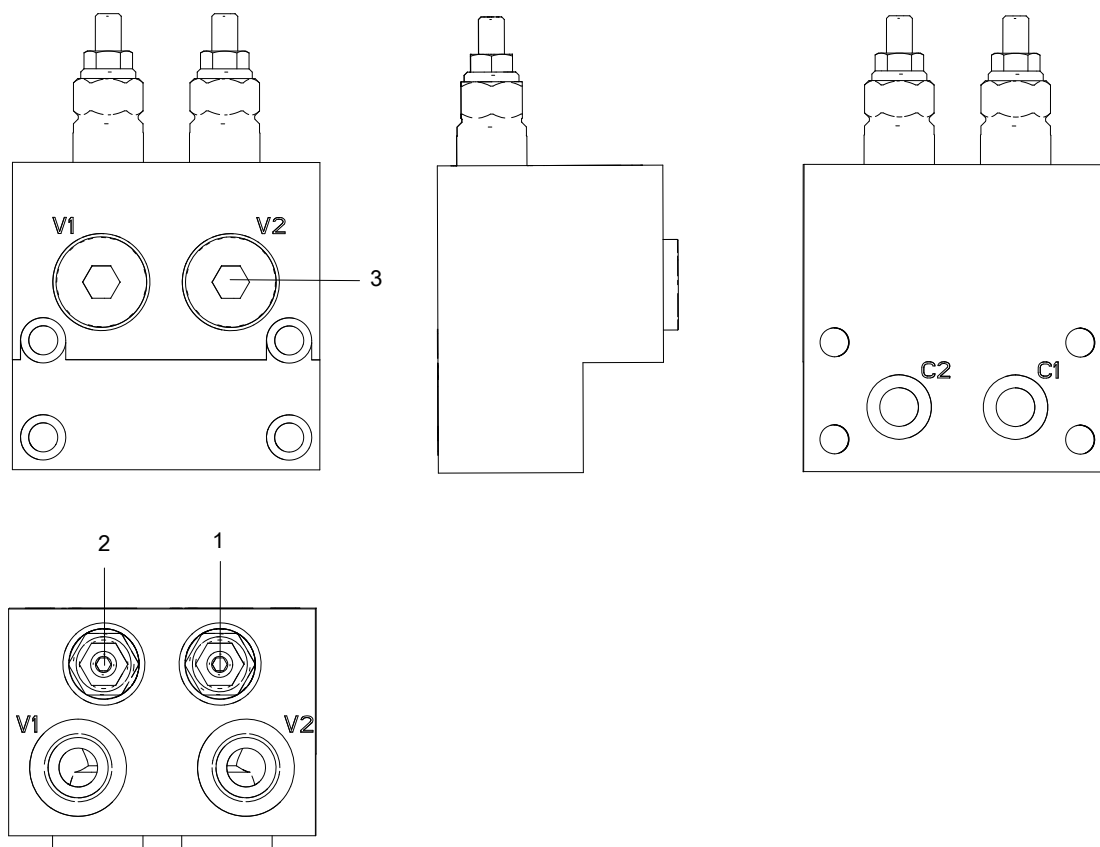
Telescoping counterbalance valve (PN.202040003016)
